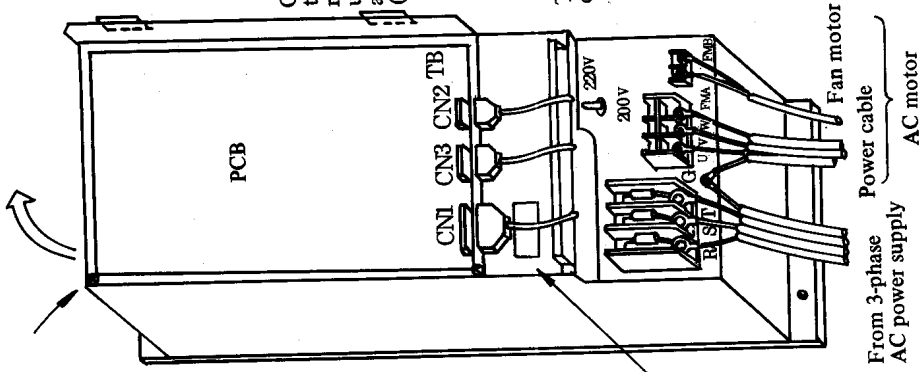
How to open the AC SPINDLE SERVO UNIT series cover (1/2)
